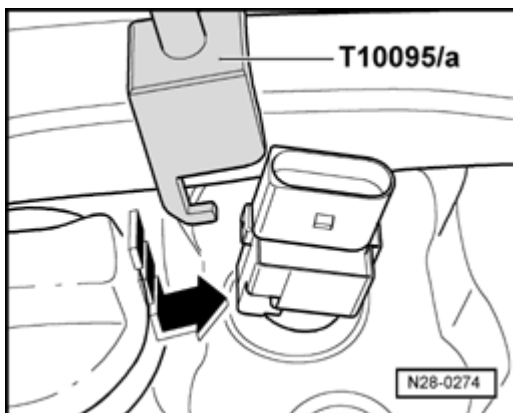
Pushing The Remover T10095/A From The Straight Connector Side
